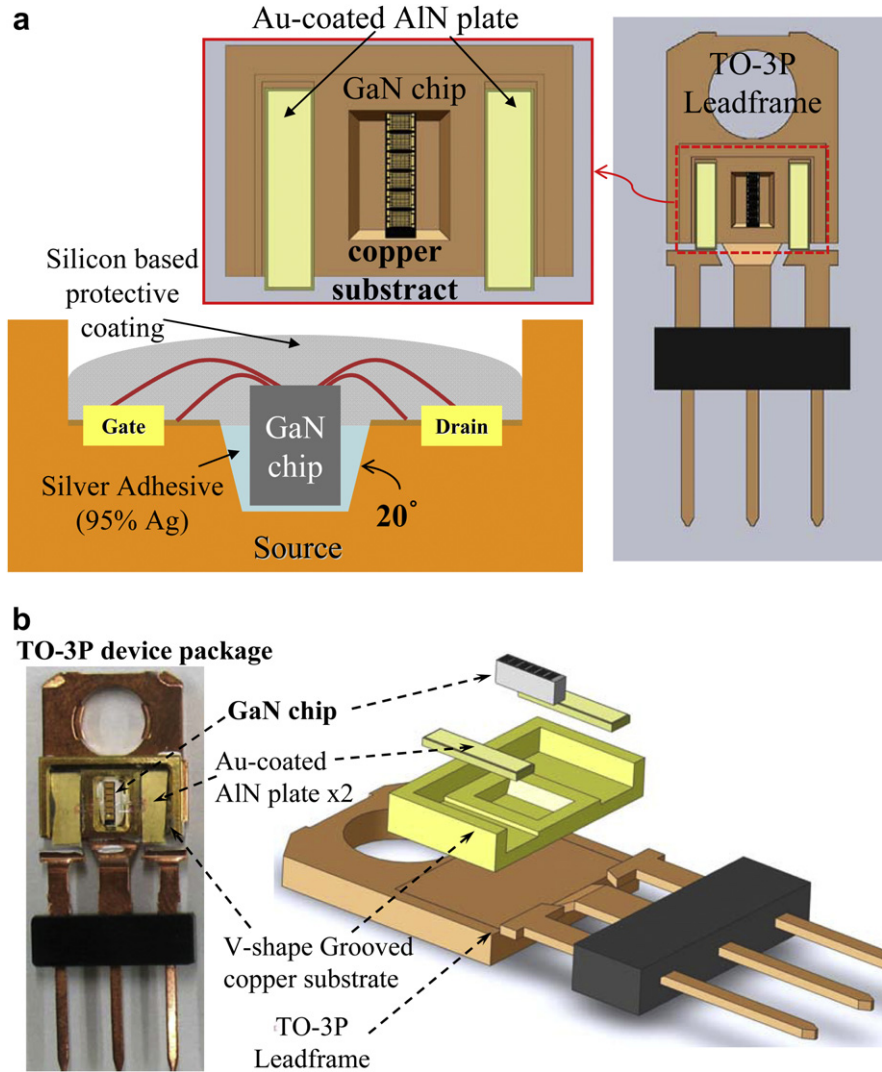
Packaging processes of GaN HEMTs power device. (a) Die attachment on Cu base with thermoset paste; bonding with wires on to pads; covered with protective coating. (b) Mounted the V-groove Cu base on TO-3P leadframe.
